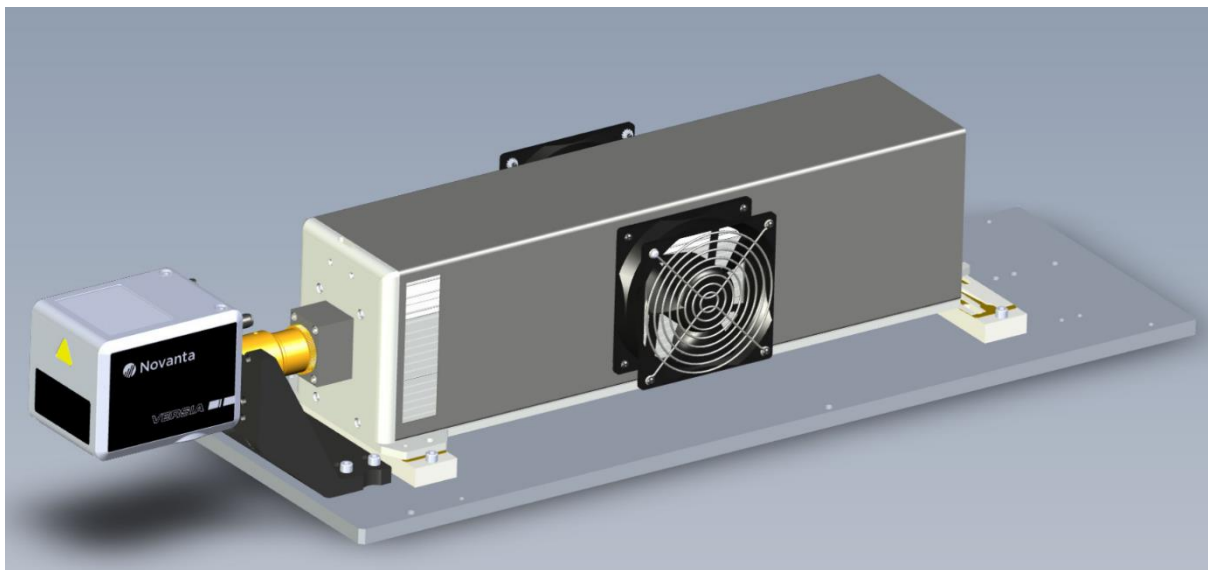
Drawing of the assembled Integrator package containing a ti100 laser and a VERSIA scan head.
